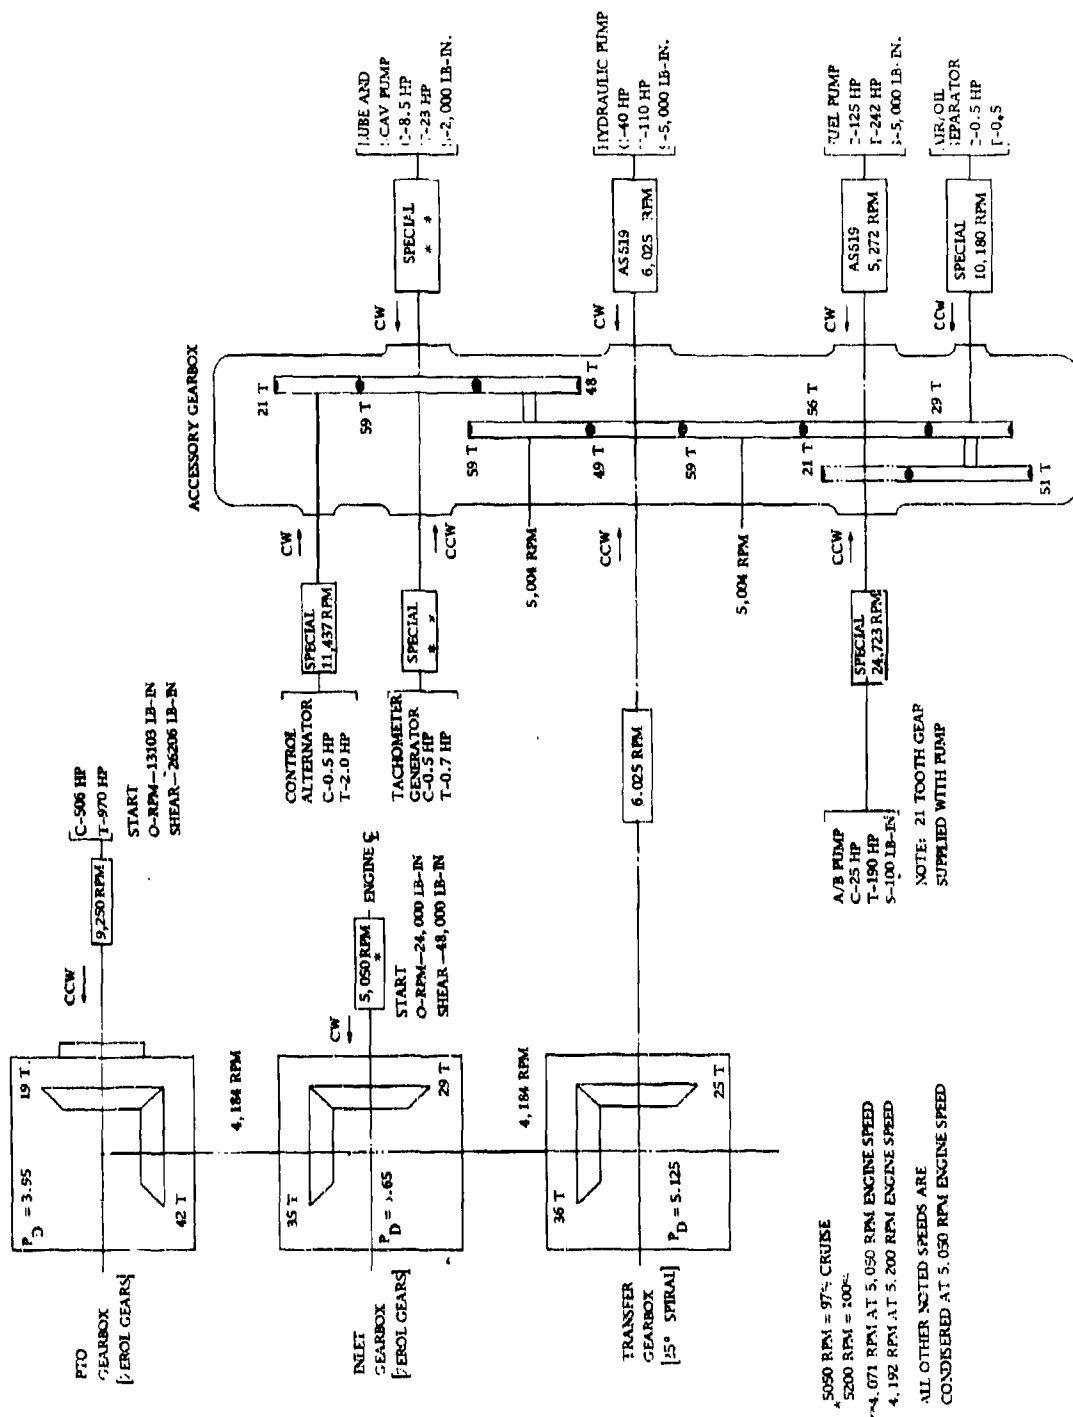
SCHEMATIC-GEARBOX ASSEMBLY
